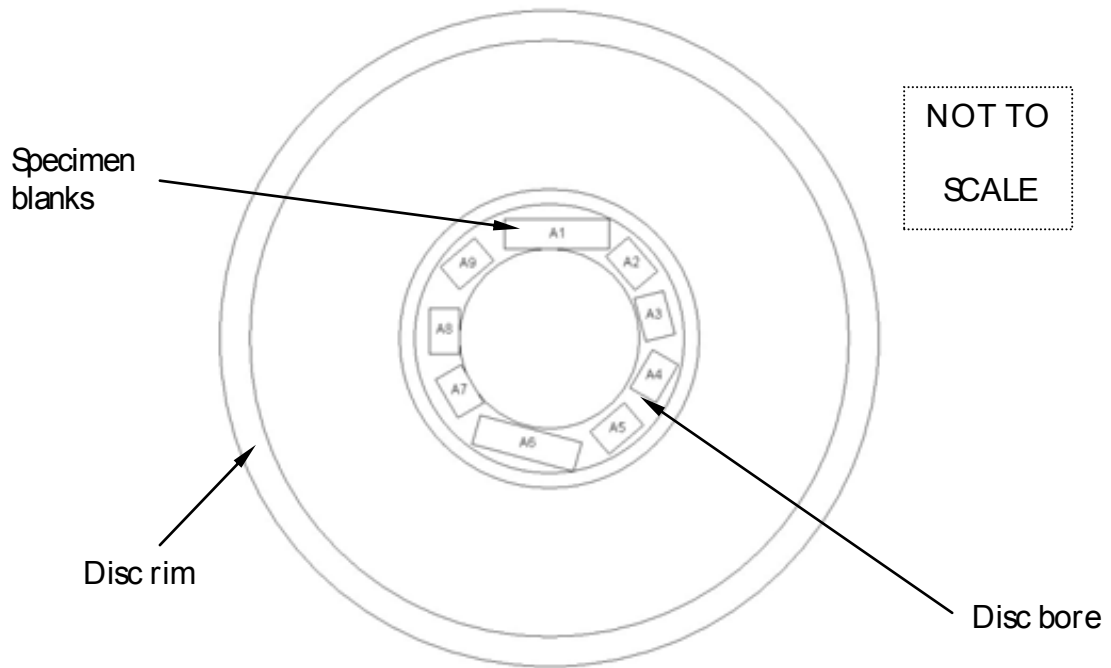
Sectioning of Ti6242 specimen blanks from compressor disc bores (Plan view schematic of disc front face)
